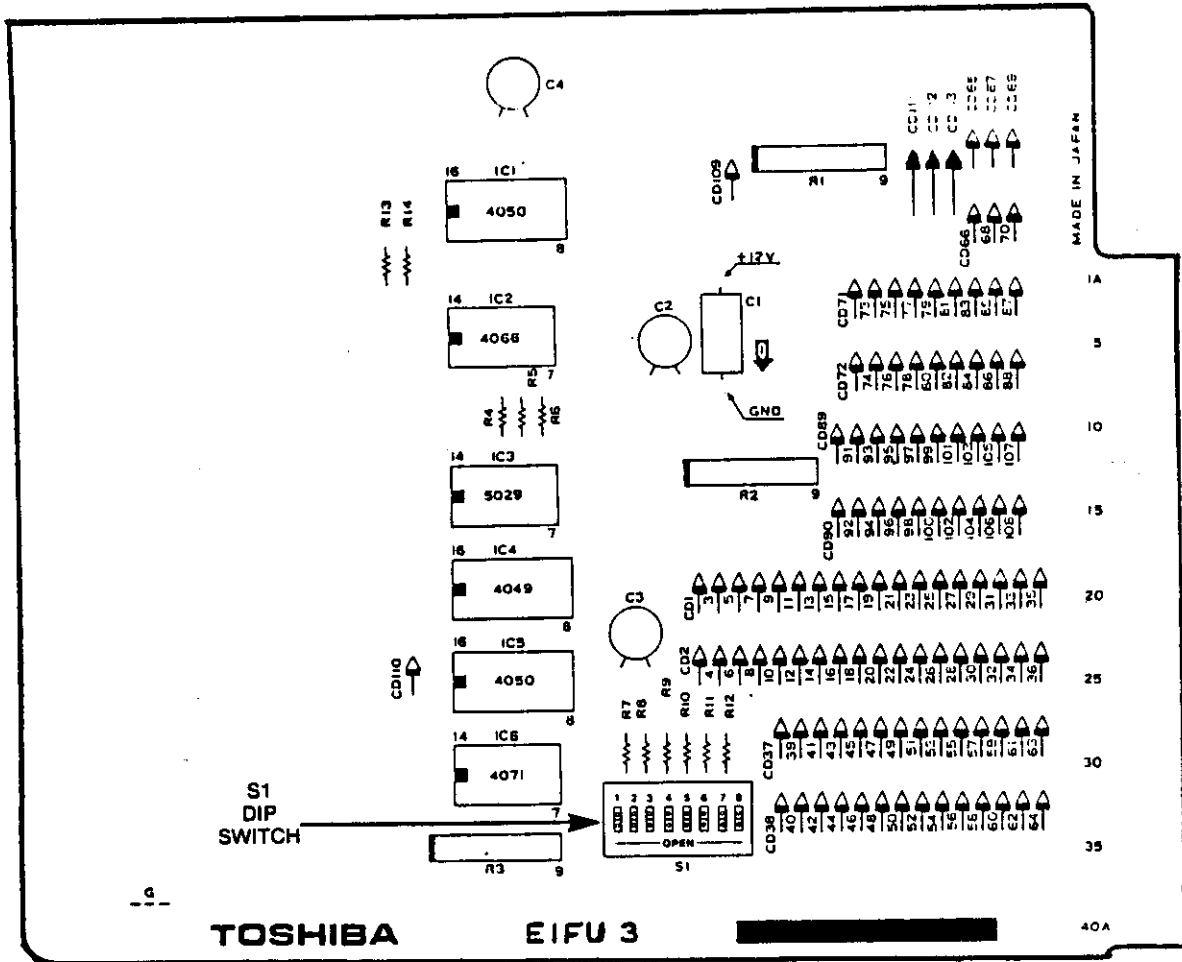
EIFU-3 PCB - PHYSICAL LAYOUT
